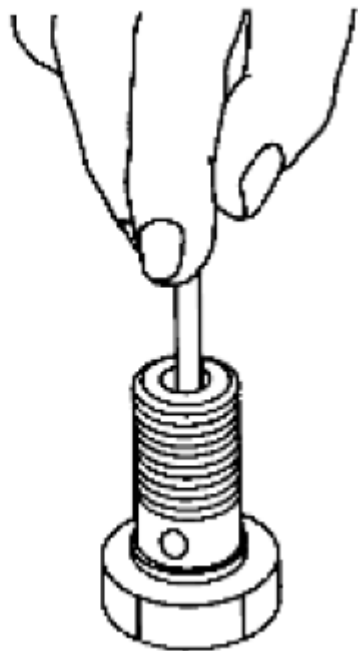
Pressing Check Valve In Oil Jet Relief Valve
